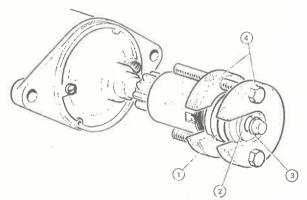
Using main spring compressing tool to dismantle circlip-retained 'SB' type drive 1 Main spring 2 Shroud washer 3 Circlip
